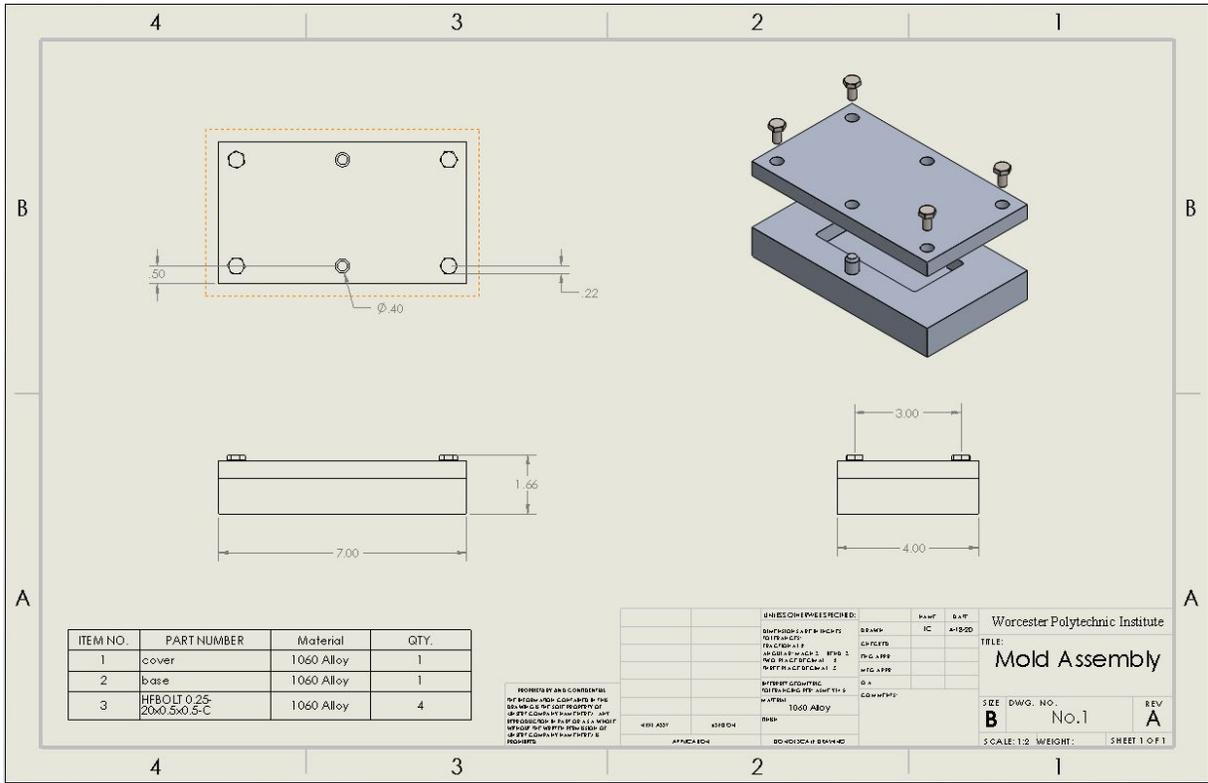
Drawing sheet for rectangular mold configuration.
